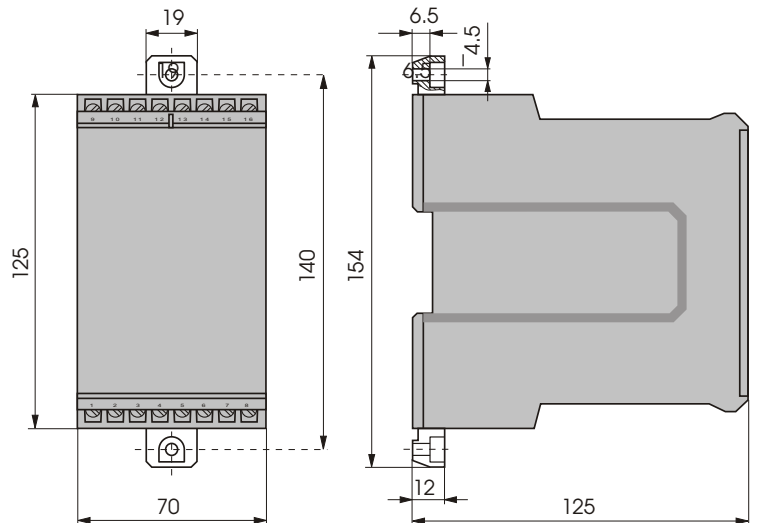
RISH Ducer* F11 two output in housing E16 with the screw hole brackets pulled out for wall mounting.
